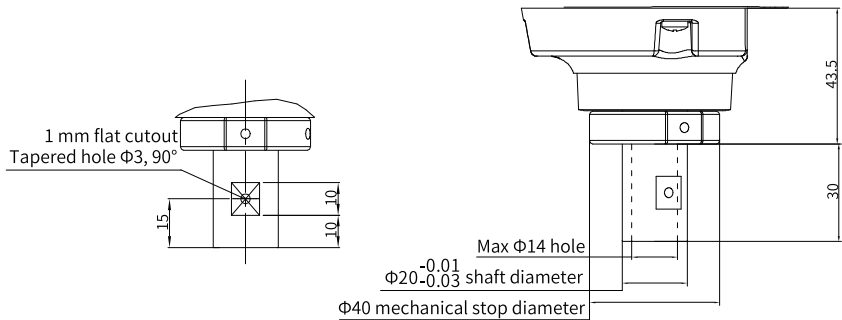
Auxiliary tooling installation dimensions for IR-TS5-55Z15S-INT (unit: mm)
